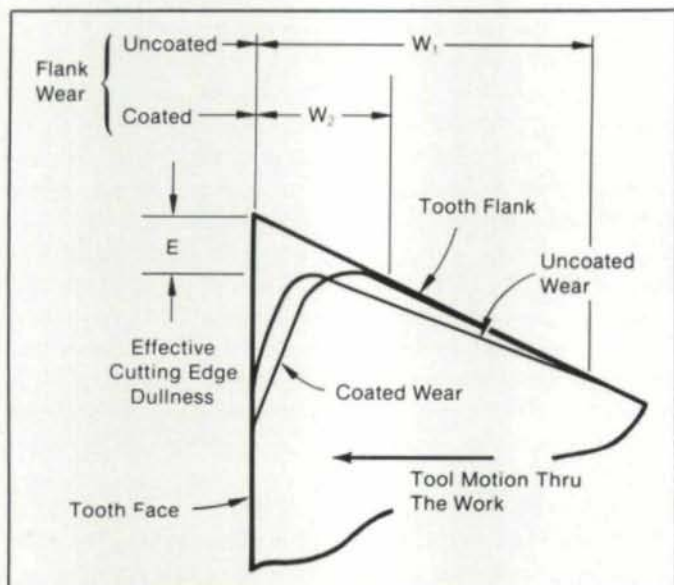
Flank wear when holding cutting edge dullness constant for coated vs. uncoated tools.
